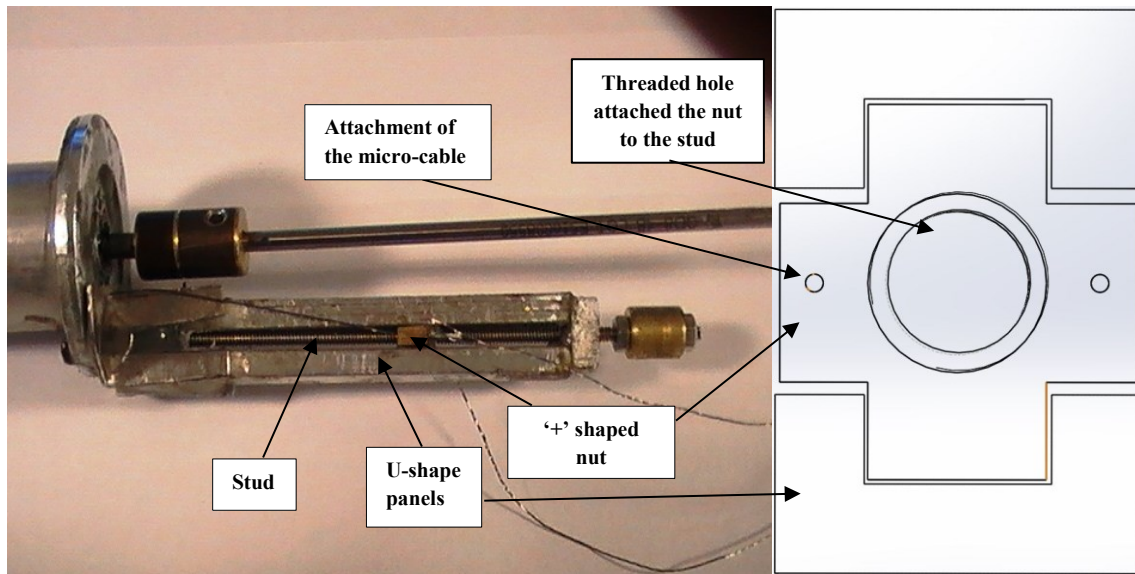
Pull-bend mechanism (left), the '+' shaped nut is attached to the stud and contained by U-shape panels. (Right) an engineering drawing of cross-sectional view showing the position of the nut within the panel.
